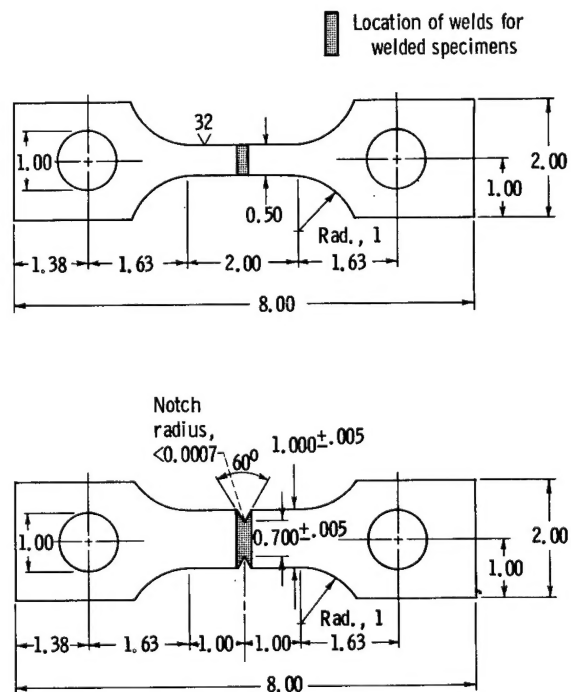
Smooth- and sharp-notch sheet tensile specimens. (Dimensions in inches.)
